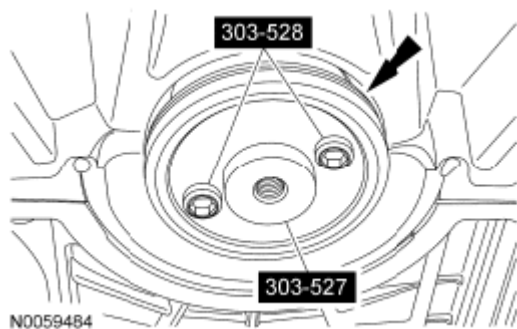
Identifying Crankshaft Rear Oil Seal Screws
